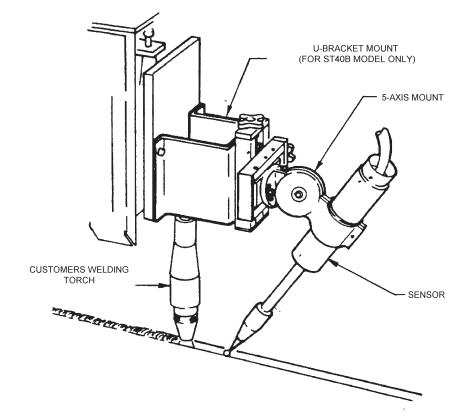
OPT. U-BRACKET MOUNTING BRACKET (ST40)
